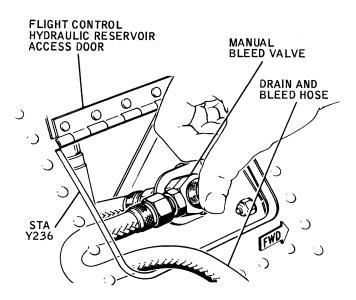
Flight Control Hydraulic Manual Bleed Valve
